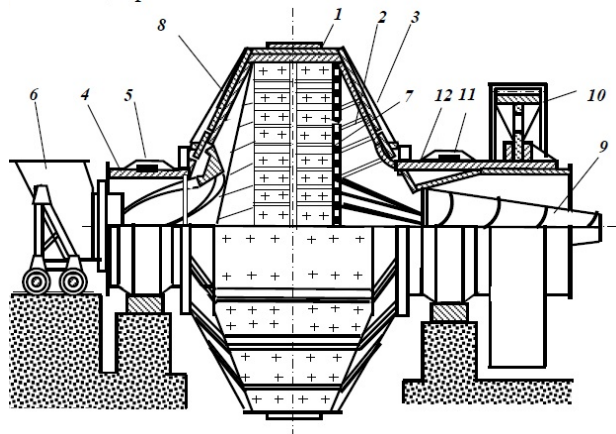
The mill is a wet type of self-grinding type “Cascade”, a general view: 1 – drum; 2 – lifts; 3, 8 – face caps; 4 – boot pin; 5, 11 – bearings; 6 – boot device; 7 – grating; 9 – washing drum; 10 – crown gear; 12 – unloading pin.
